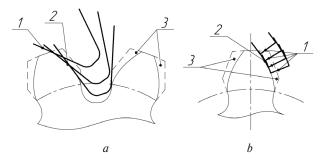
Possible interaction of cutting edge of the tool placed tangent to the machining surface (a), placed normally to the machining surface (b):
